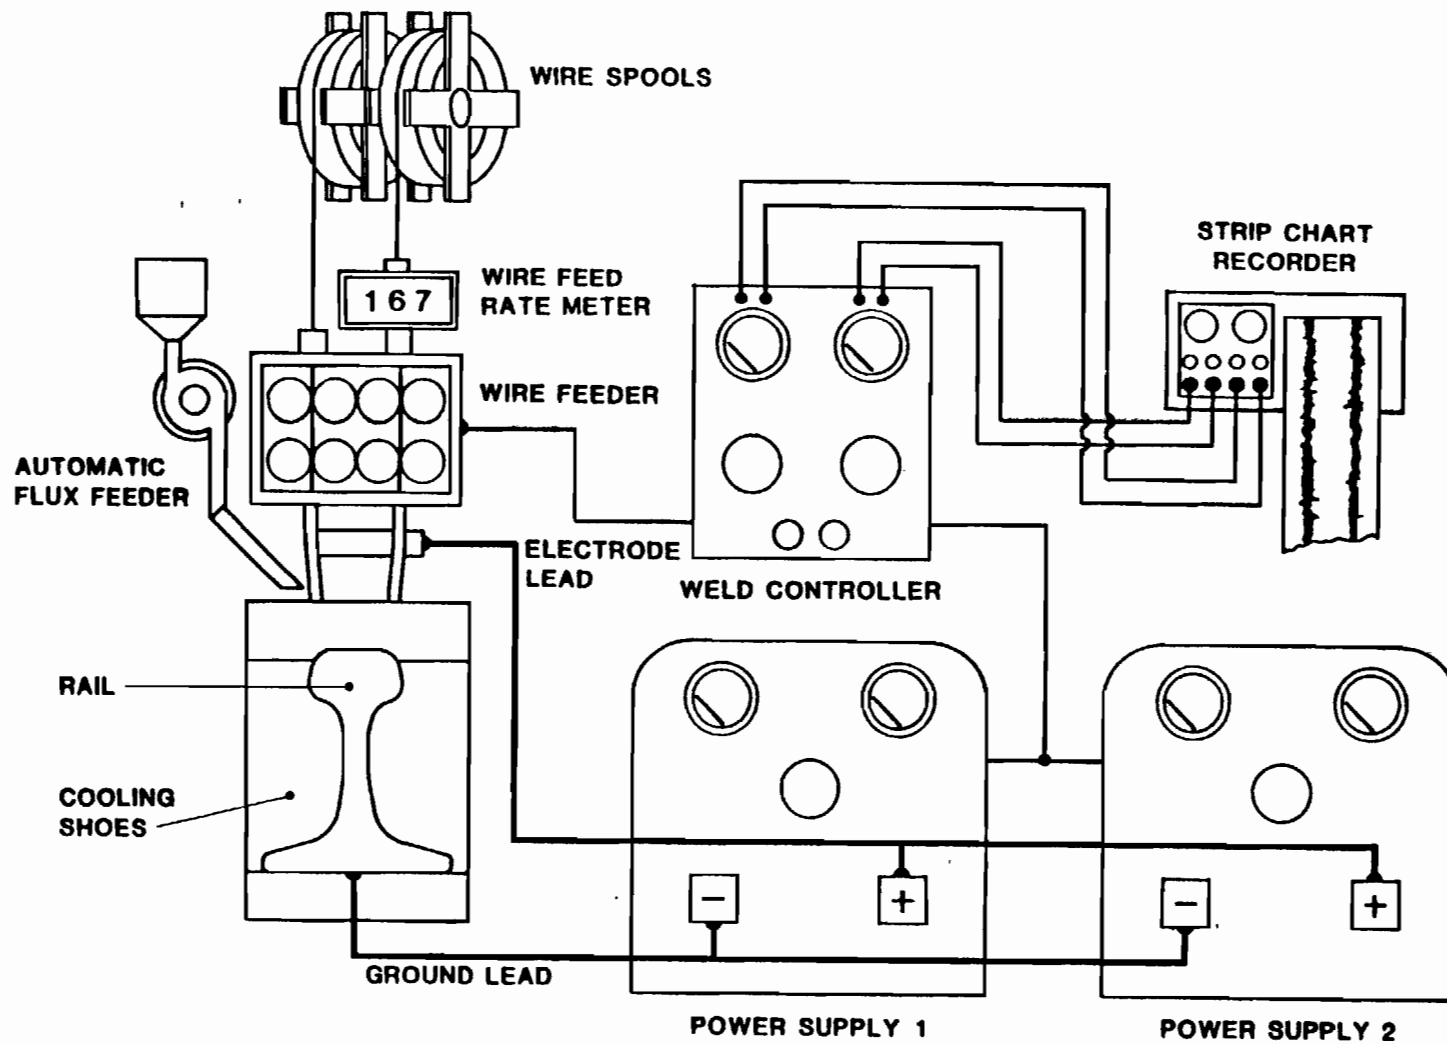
SCHEMATIC OF CONSUMABLE GUIDE TUBE ELECTROSLAG WELDING PROCESS.
